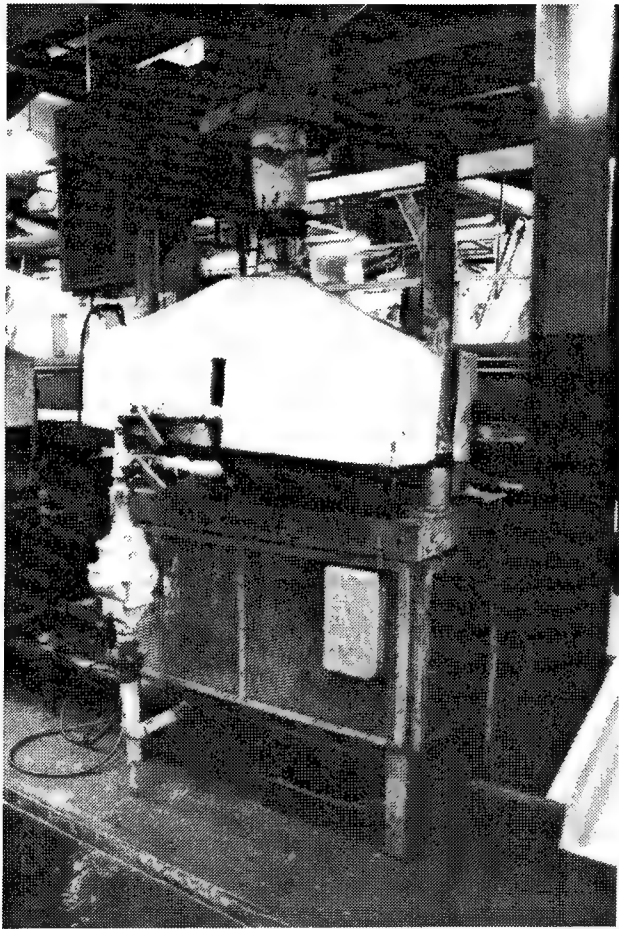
Building 3: Case Body Anneal Machine manufactured by Jennings Machine.
